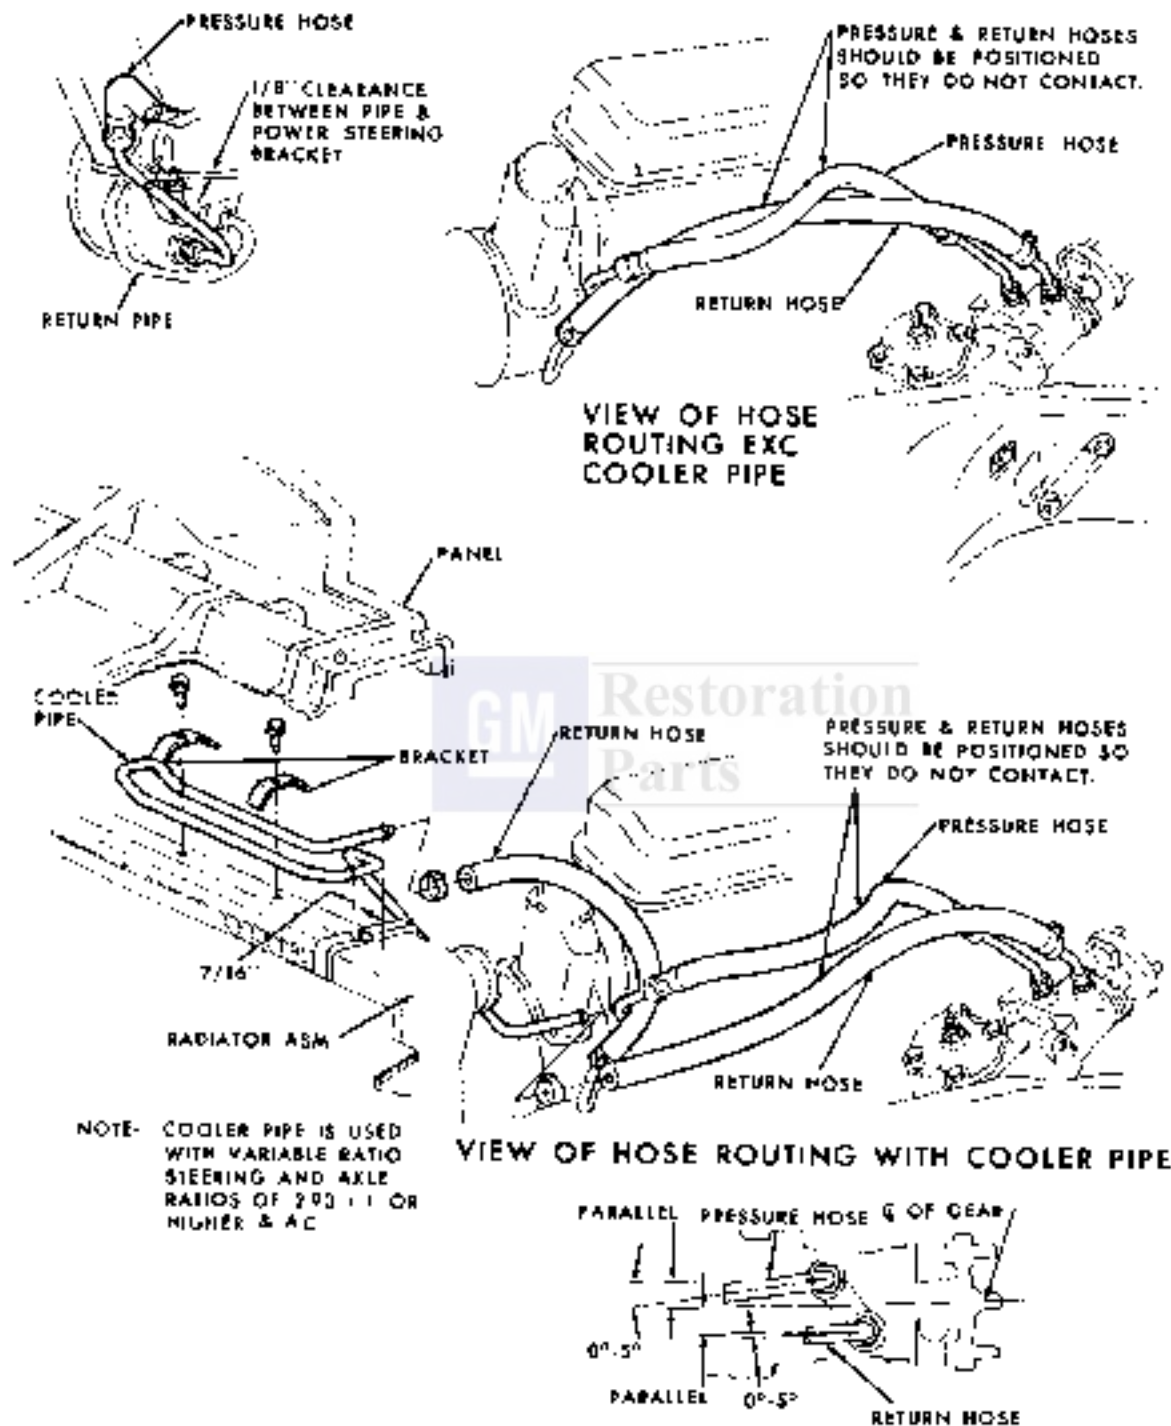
Pontiac Installation of Power Steering Gear Assembly
